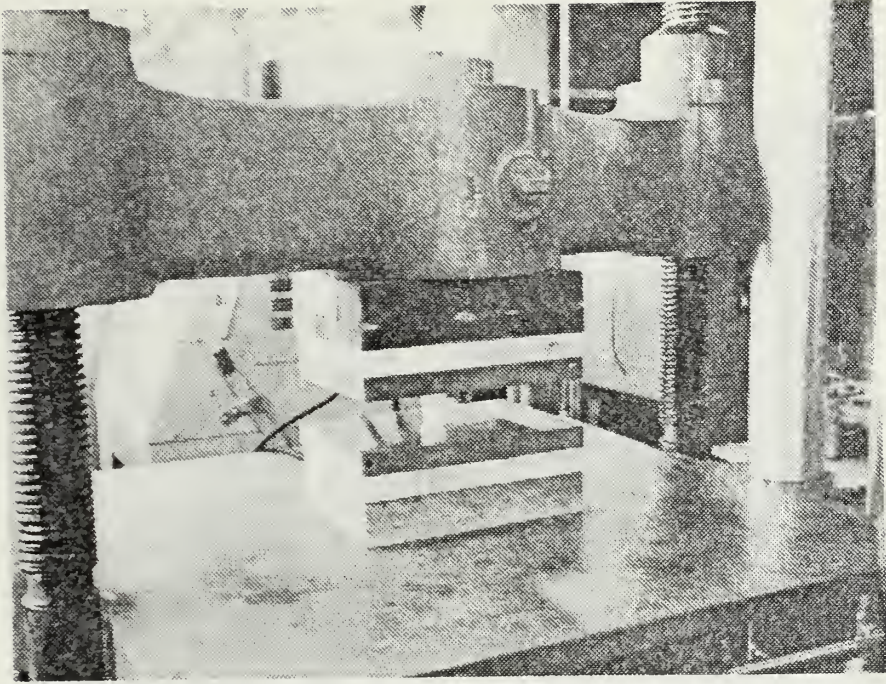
Baldwin-Tate-Emery 60,000 lb. testing machine with heated platen arrangement, used for upset forging.
